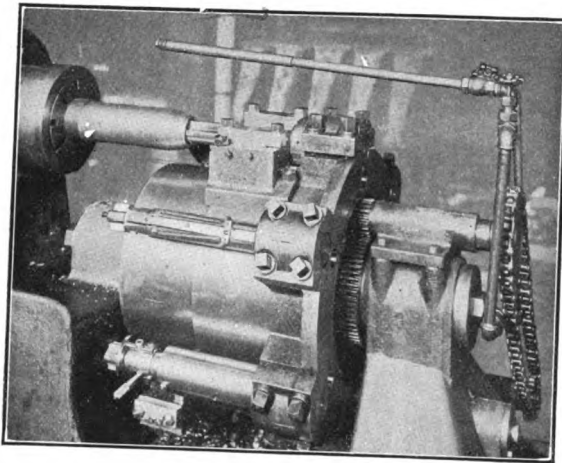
TURRET AND TOOLS AT WORK ON 18-LB. HIGH-EXPLOSIVE SHELL
